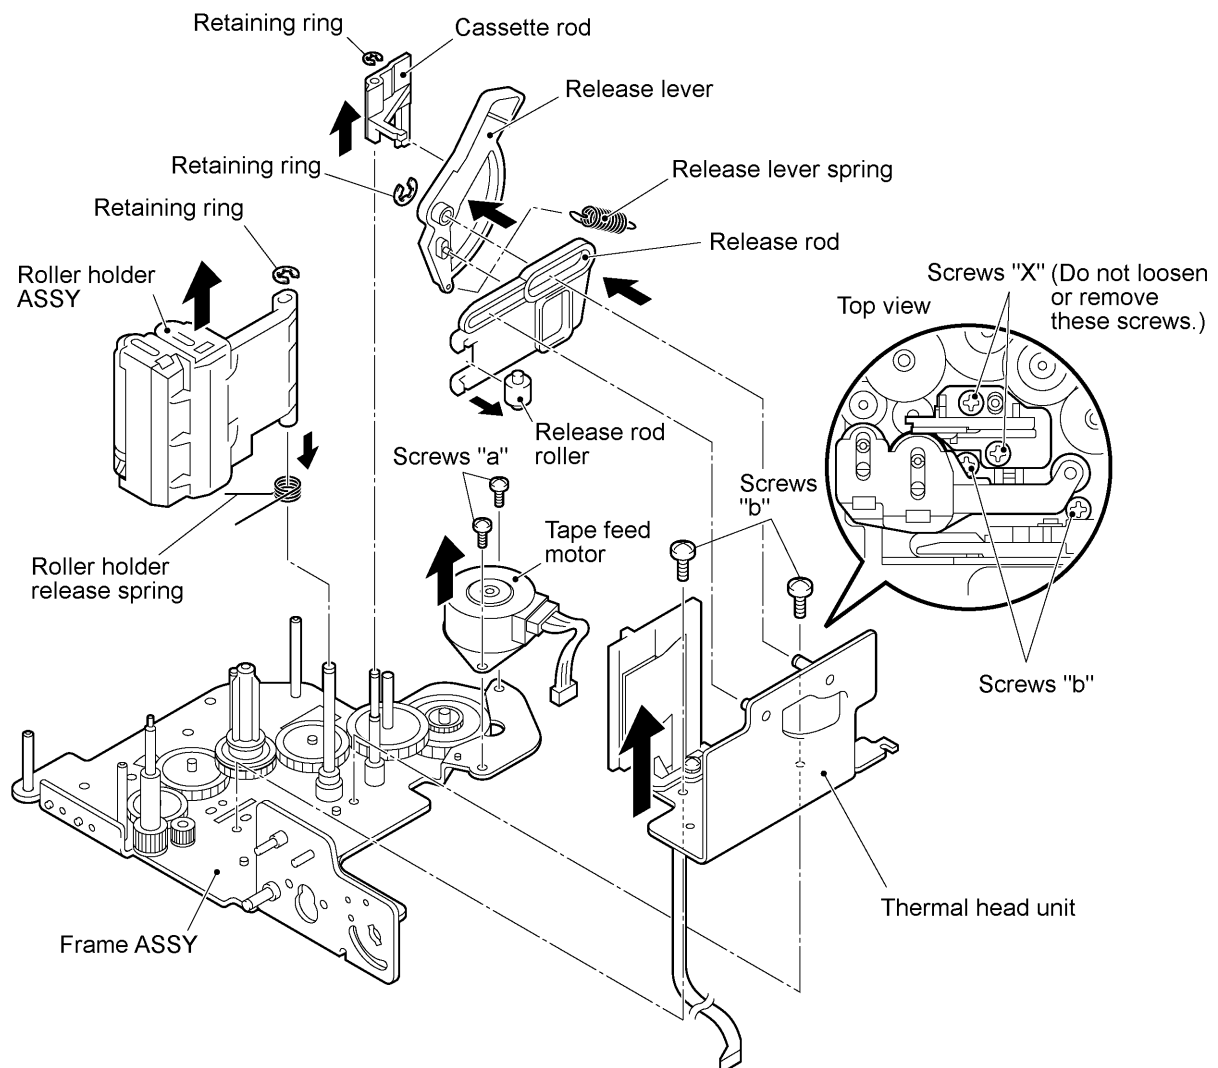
Removing the Roller Holder ASSY, Thermal Head Unit, and Tape Feed Motor
